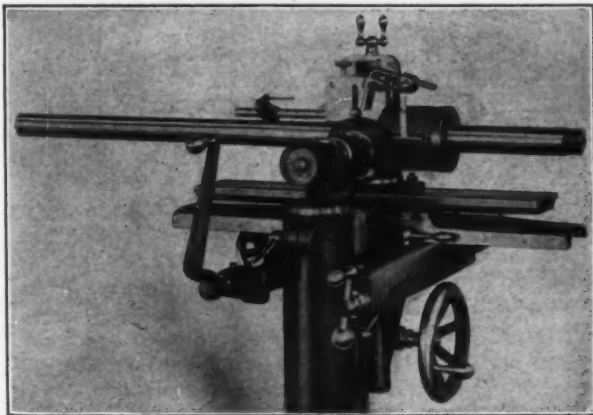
Sharpening a 5½-In. Stem Reamer.
